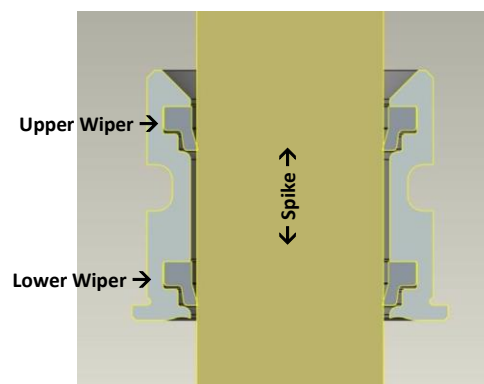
Spike Isolator Assembly w/Wipers in Cross Section
